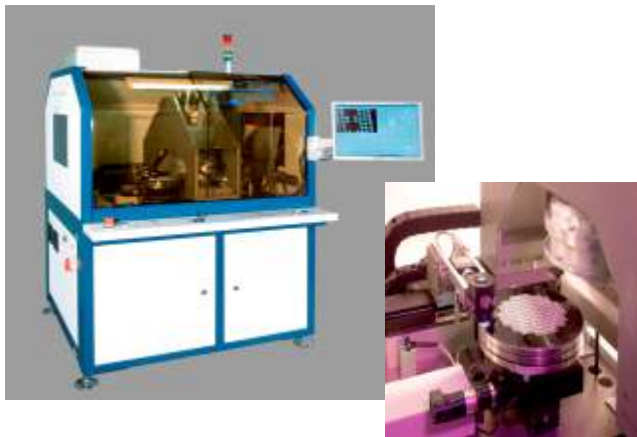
Images of the Wafer Level Solder Sphere Transfer Tool (Pac Tech Ultra-SB² or GBP).
